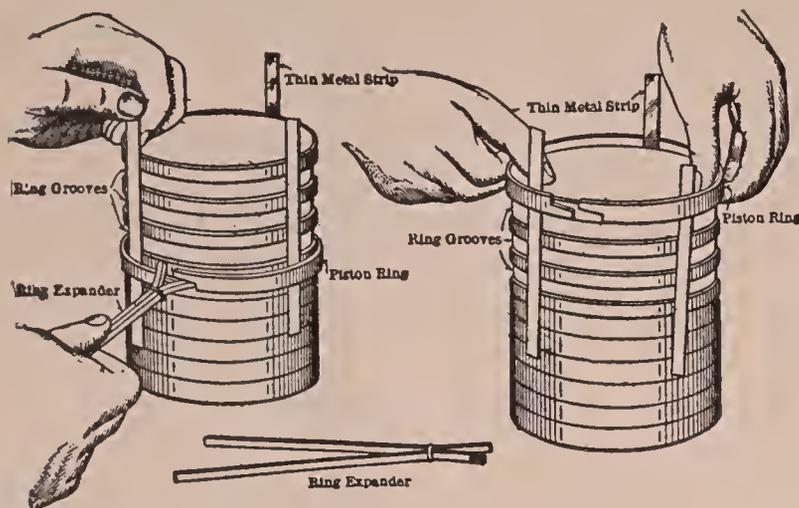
How piston rings are taken off with a minimum of trouble and no appreciable breakage of these brittle parts.
